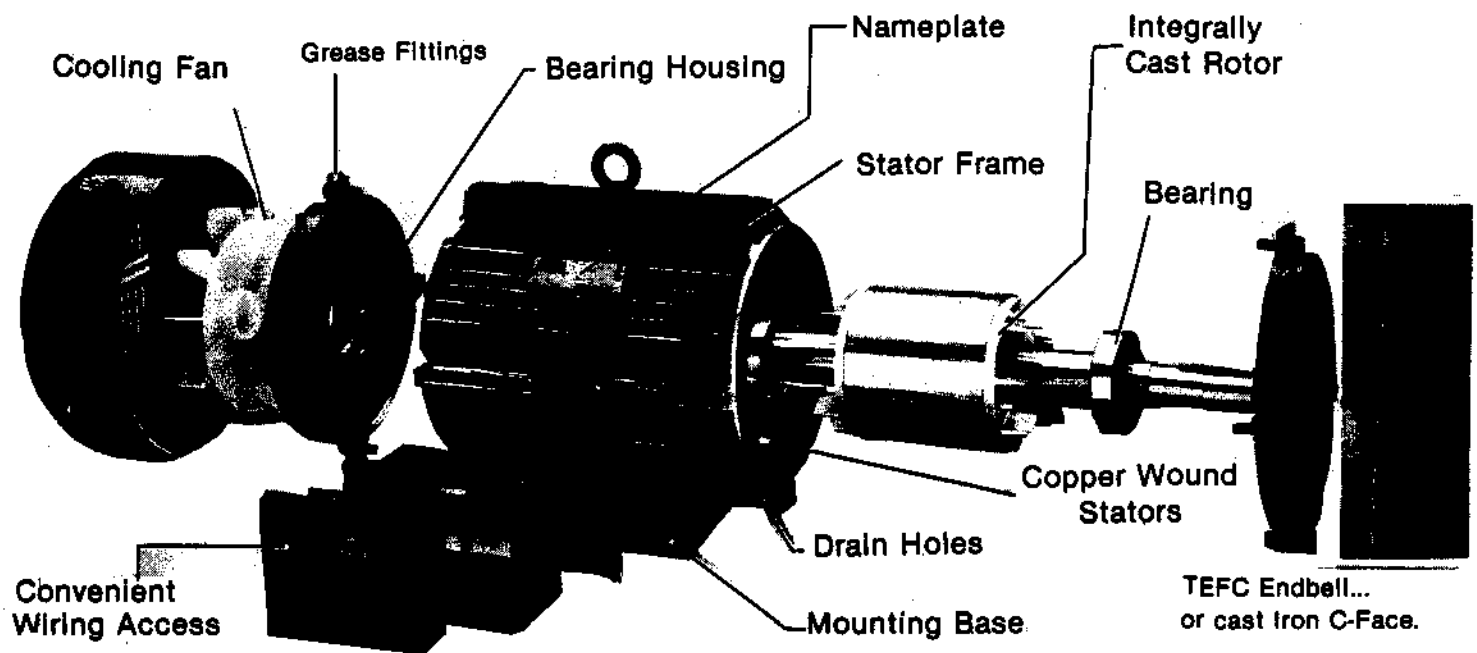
Cutaway View of a SCIM (Squirrel Cage Induction Motor)
